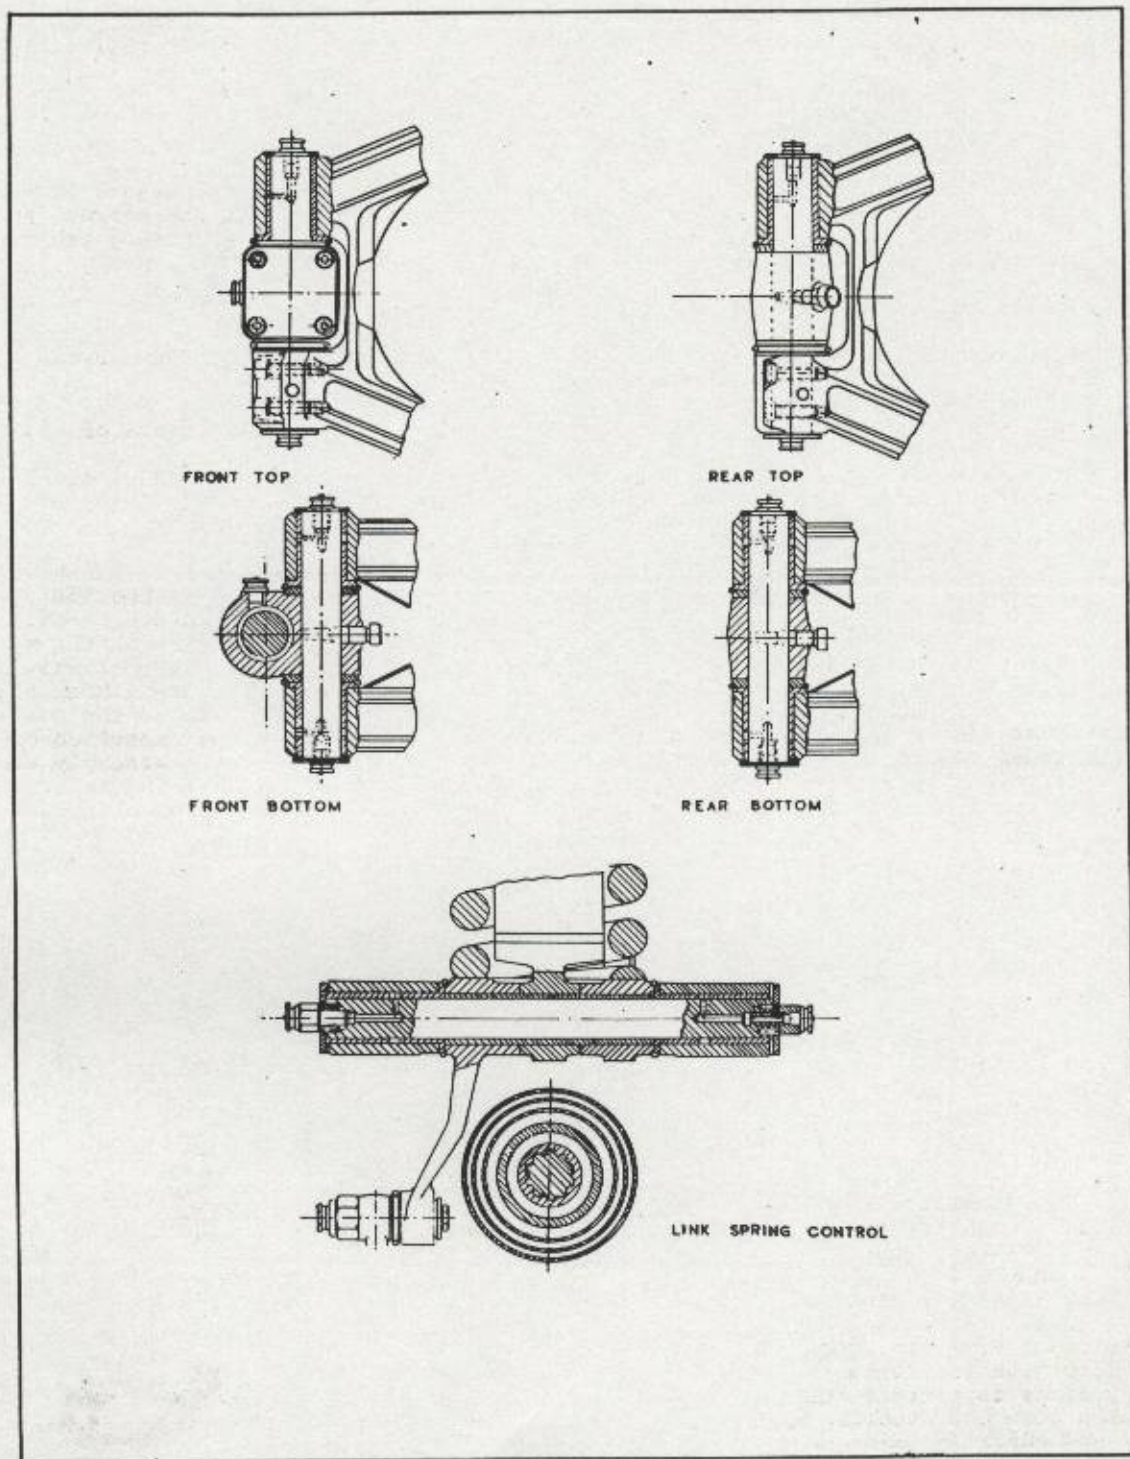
SUSPENSION PINS AND BUSHES - PART AND SECTIONAL VIEWS
